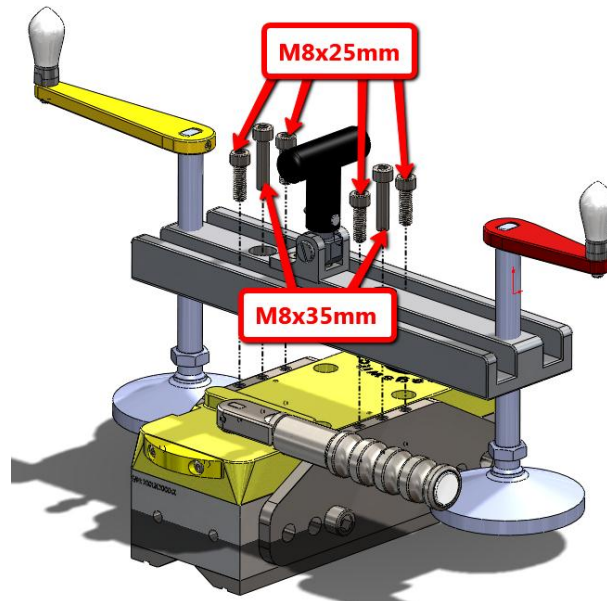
b: Connect the Side Plates (With Heavy Lifters) to the Heavy Sheet Leveler Main Plate by Four M8x25mm Bolts and Two M8x35mm Bolts
